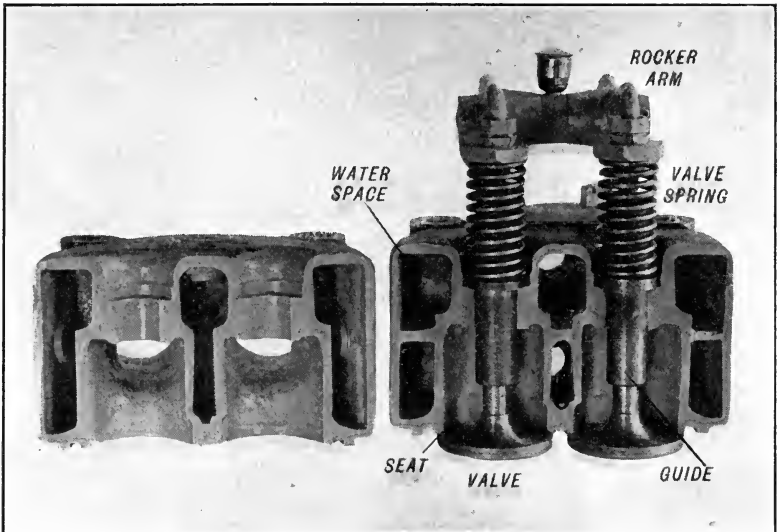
Cylinder Head of Knox Engine Cut in Two to Show Method of Valve Placing and Seating Directly in Separately Cast Member. Valves Operated by Rocker Arms. Note Exceptionally Good Water Spaces Around Valve Seats.
